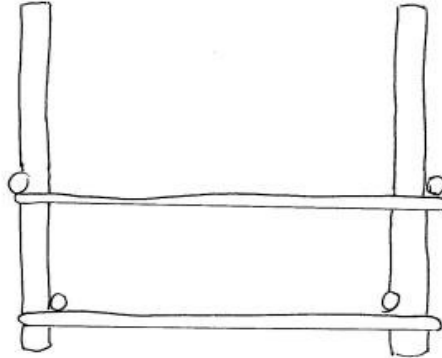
Back View with cross pieces attached – the height of attachment for front and back cross pieces is the same.
